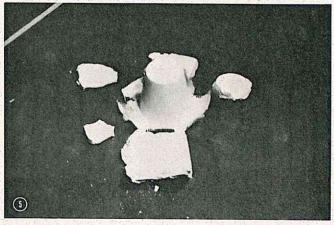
¼" cross braces in position. Fuselage bulkheads glued in place. Firewall epoxied in place. PHOTO 2: Top formers in place. PHOTO 3: Bottom formers glued in place. PHOTO 4: Fuselage sheeting completed. PHOTO 5: Cowl and broken mold. PHOTO 6: Making the wing fillets. PHOTO 7: Finished fuselage.
